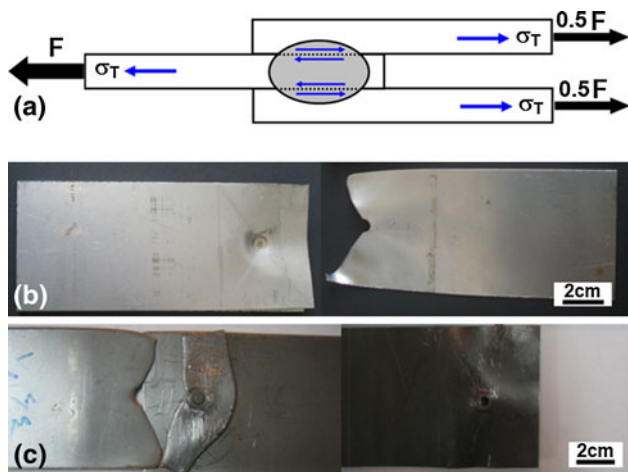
Type C joint design. (a) A simple model describing stress distribution at the interface of the sheets and at weld nugget periphery, (b) sheet tearing in base metal in specimen width direction, (c) sheet tearing and nugget pullout
